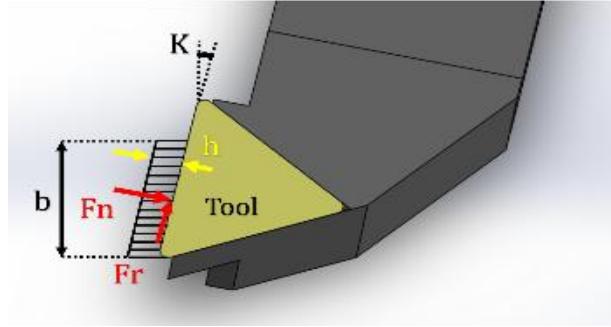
Forces and modulated chip thickness on a tool with side edge cutting angle
